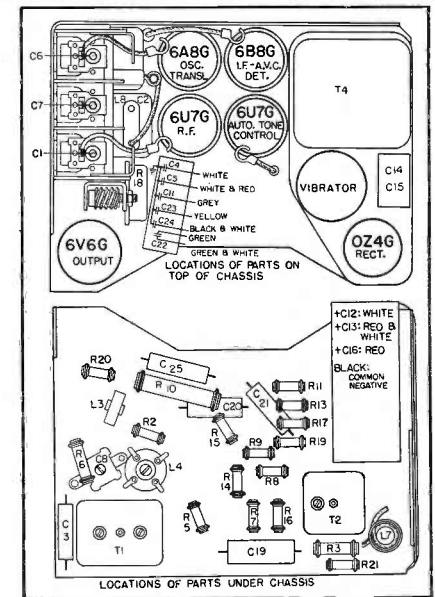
Top and bottom chassis views, Silver-tone 6100.
